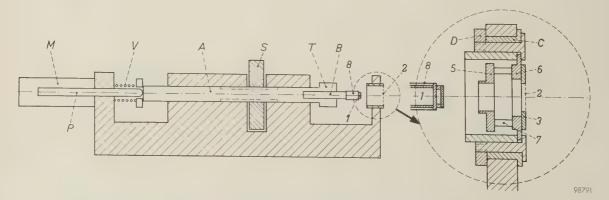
Sketch of alignment jig for cathode-grid assembly. The valve components are numerically denoted as in fig. 1. C insulating ring of polytetrafluorethylene. D insulating ring of ebonite. The movable spindle A carries cathode I by means of the sleeve B mounted in the chuck T. S adjusting screw. P plunger of dial gauge M. V spring to prevent backlash.
